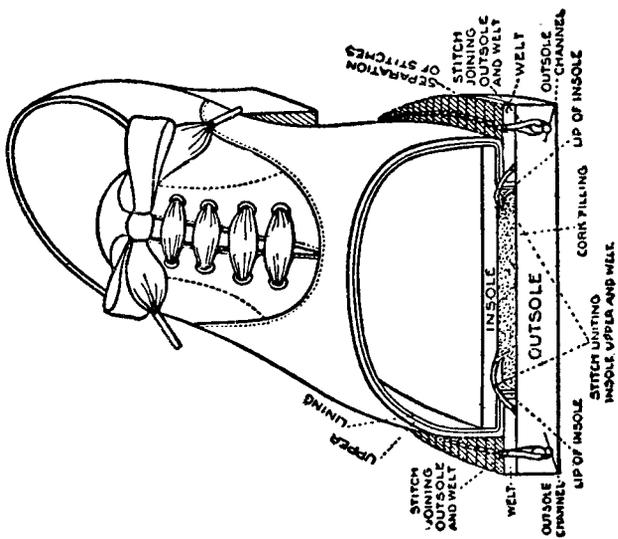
CROSS SECTION OF A GOODYEAR WELT SHOE.
